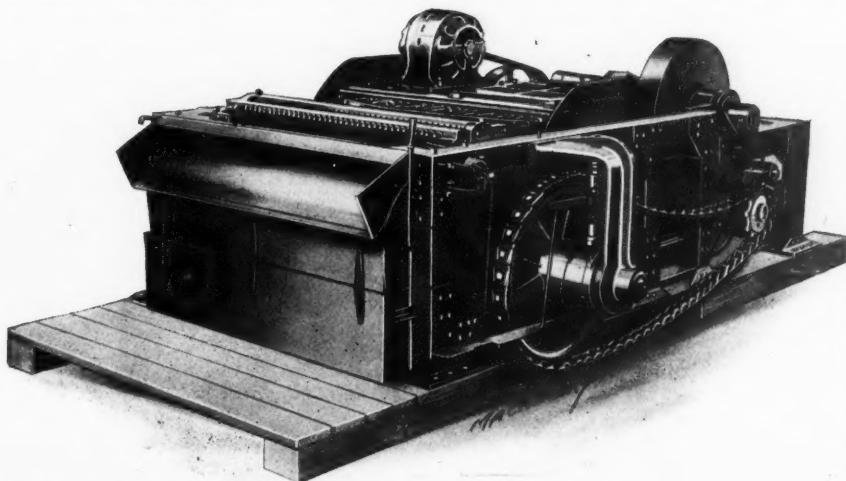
Same View of Machine as shown in Fig. 1, but with Cover closed
